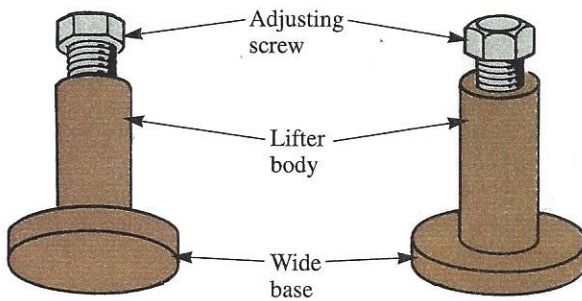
Valve lifter may be called a tappet or cam follower. Adjustment screw allows setting of proper valve clearance. Wide base provides a larger contact area.
